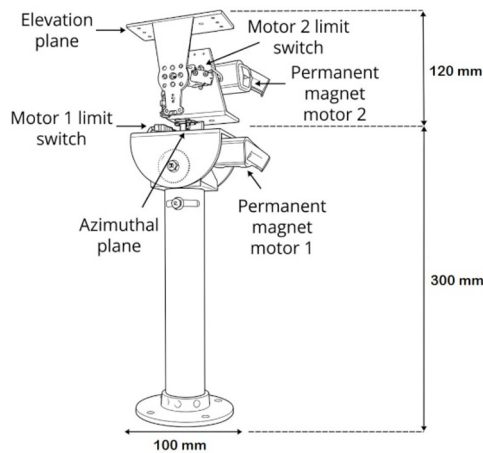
Schematic and dimensions of the dual-axis DC head.
